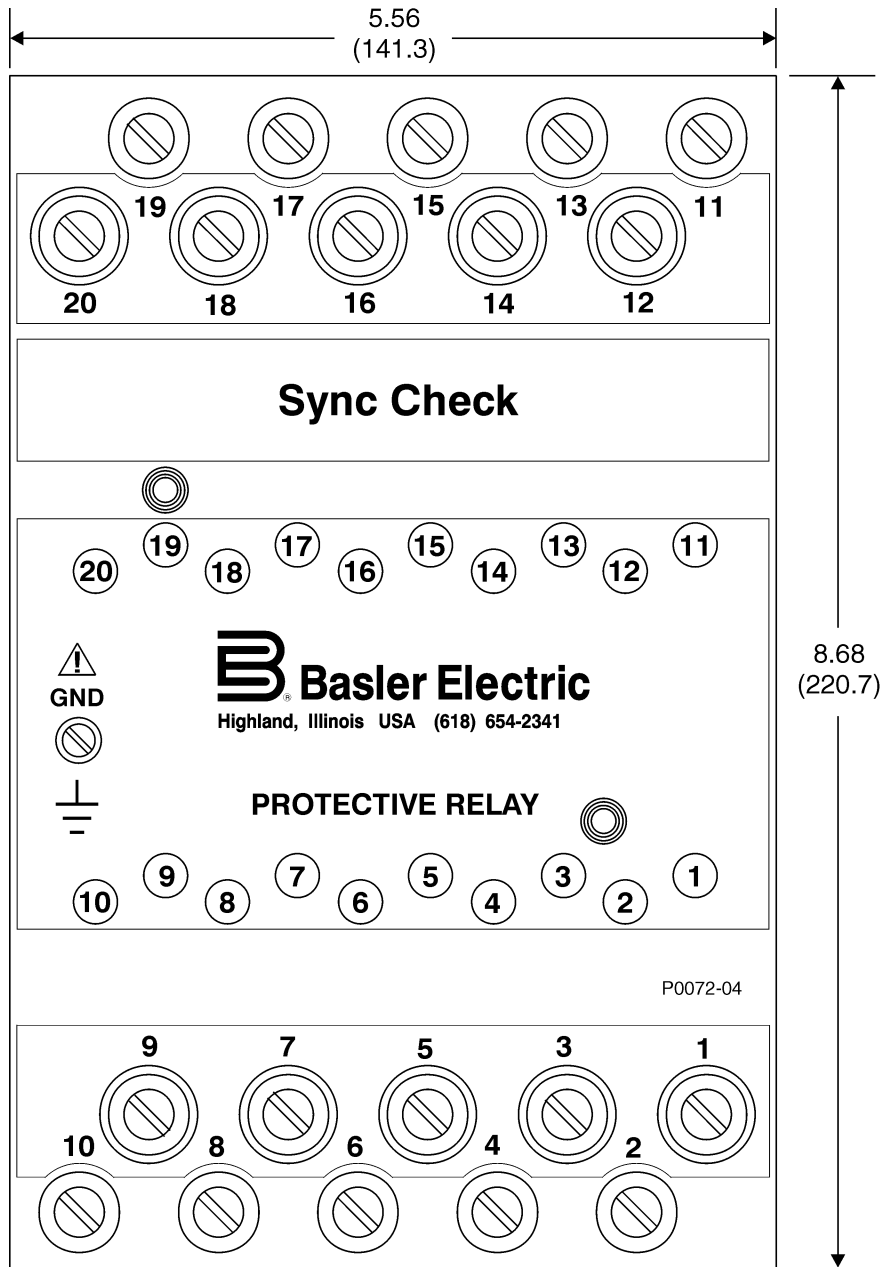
S1 Case Dimensions, Rear View, Double Ended, Projection Mount
